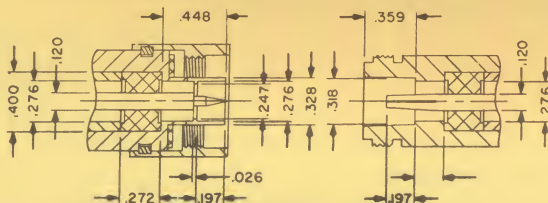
Nominal dimensions (with zero tolerances) of the Type N Connector as described in MIL-C-71.
